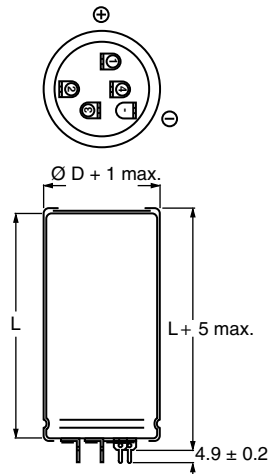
Printed wiring pin version (case Ø D = 40 mm)
